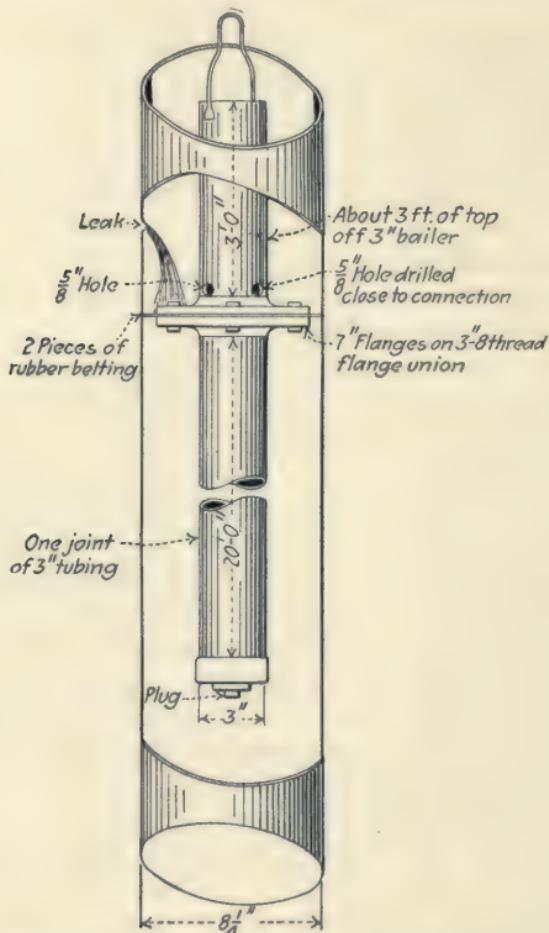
Sketch of SWAB-BAILER or CASING-TESTER to run in $8\frac{1}{4}$ in. casing. Method adaptable to all sizes of casing.
